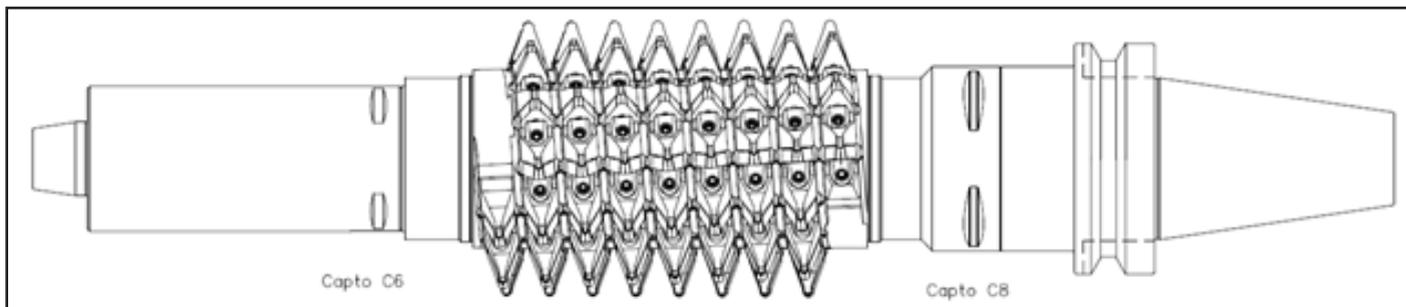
Stiffness and runout accuracy in the assembled tool are very good.
